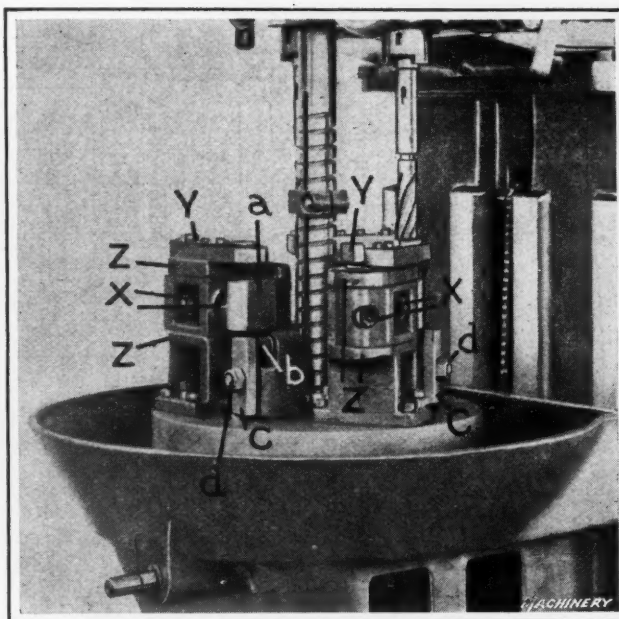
Baker Continuous Drilling Machine equipped for counterboring and reaming Motor Car Steering Knuckles
